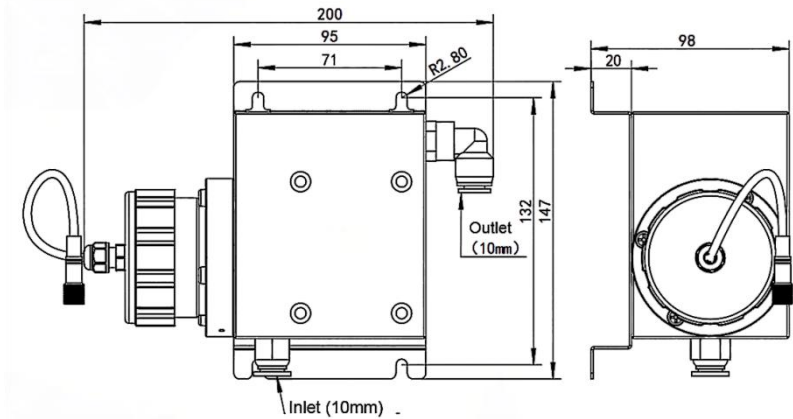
Dimensions of high range sensor with back plate (unit: mm)
